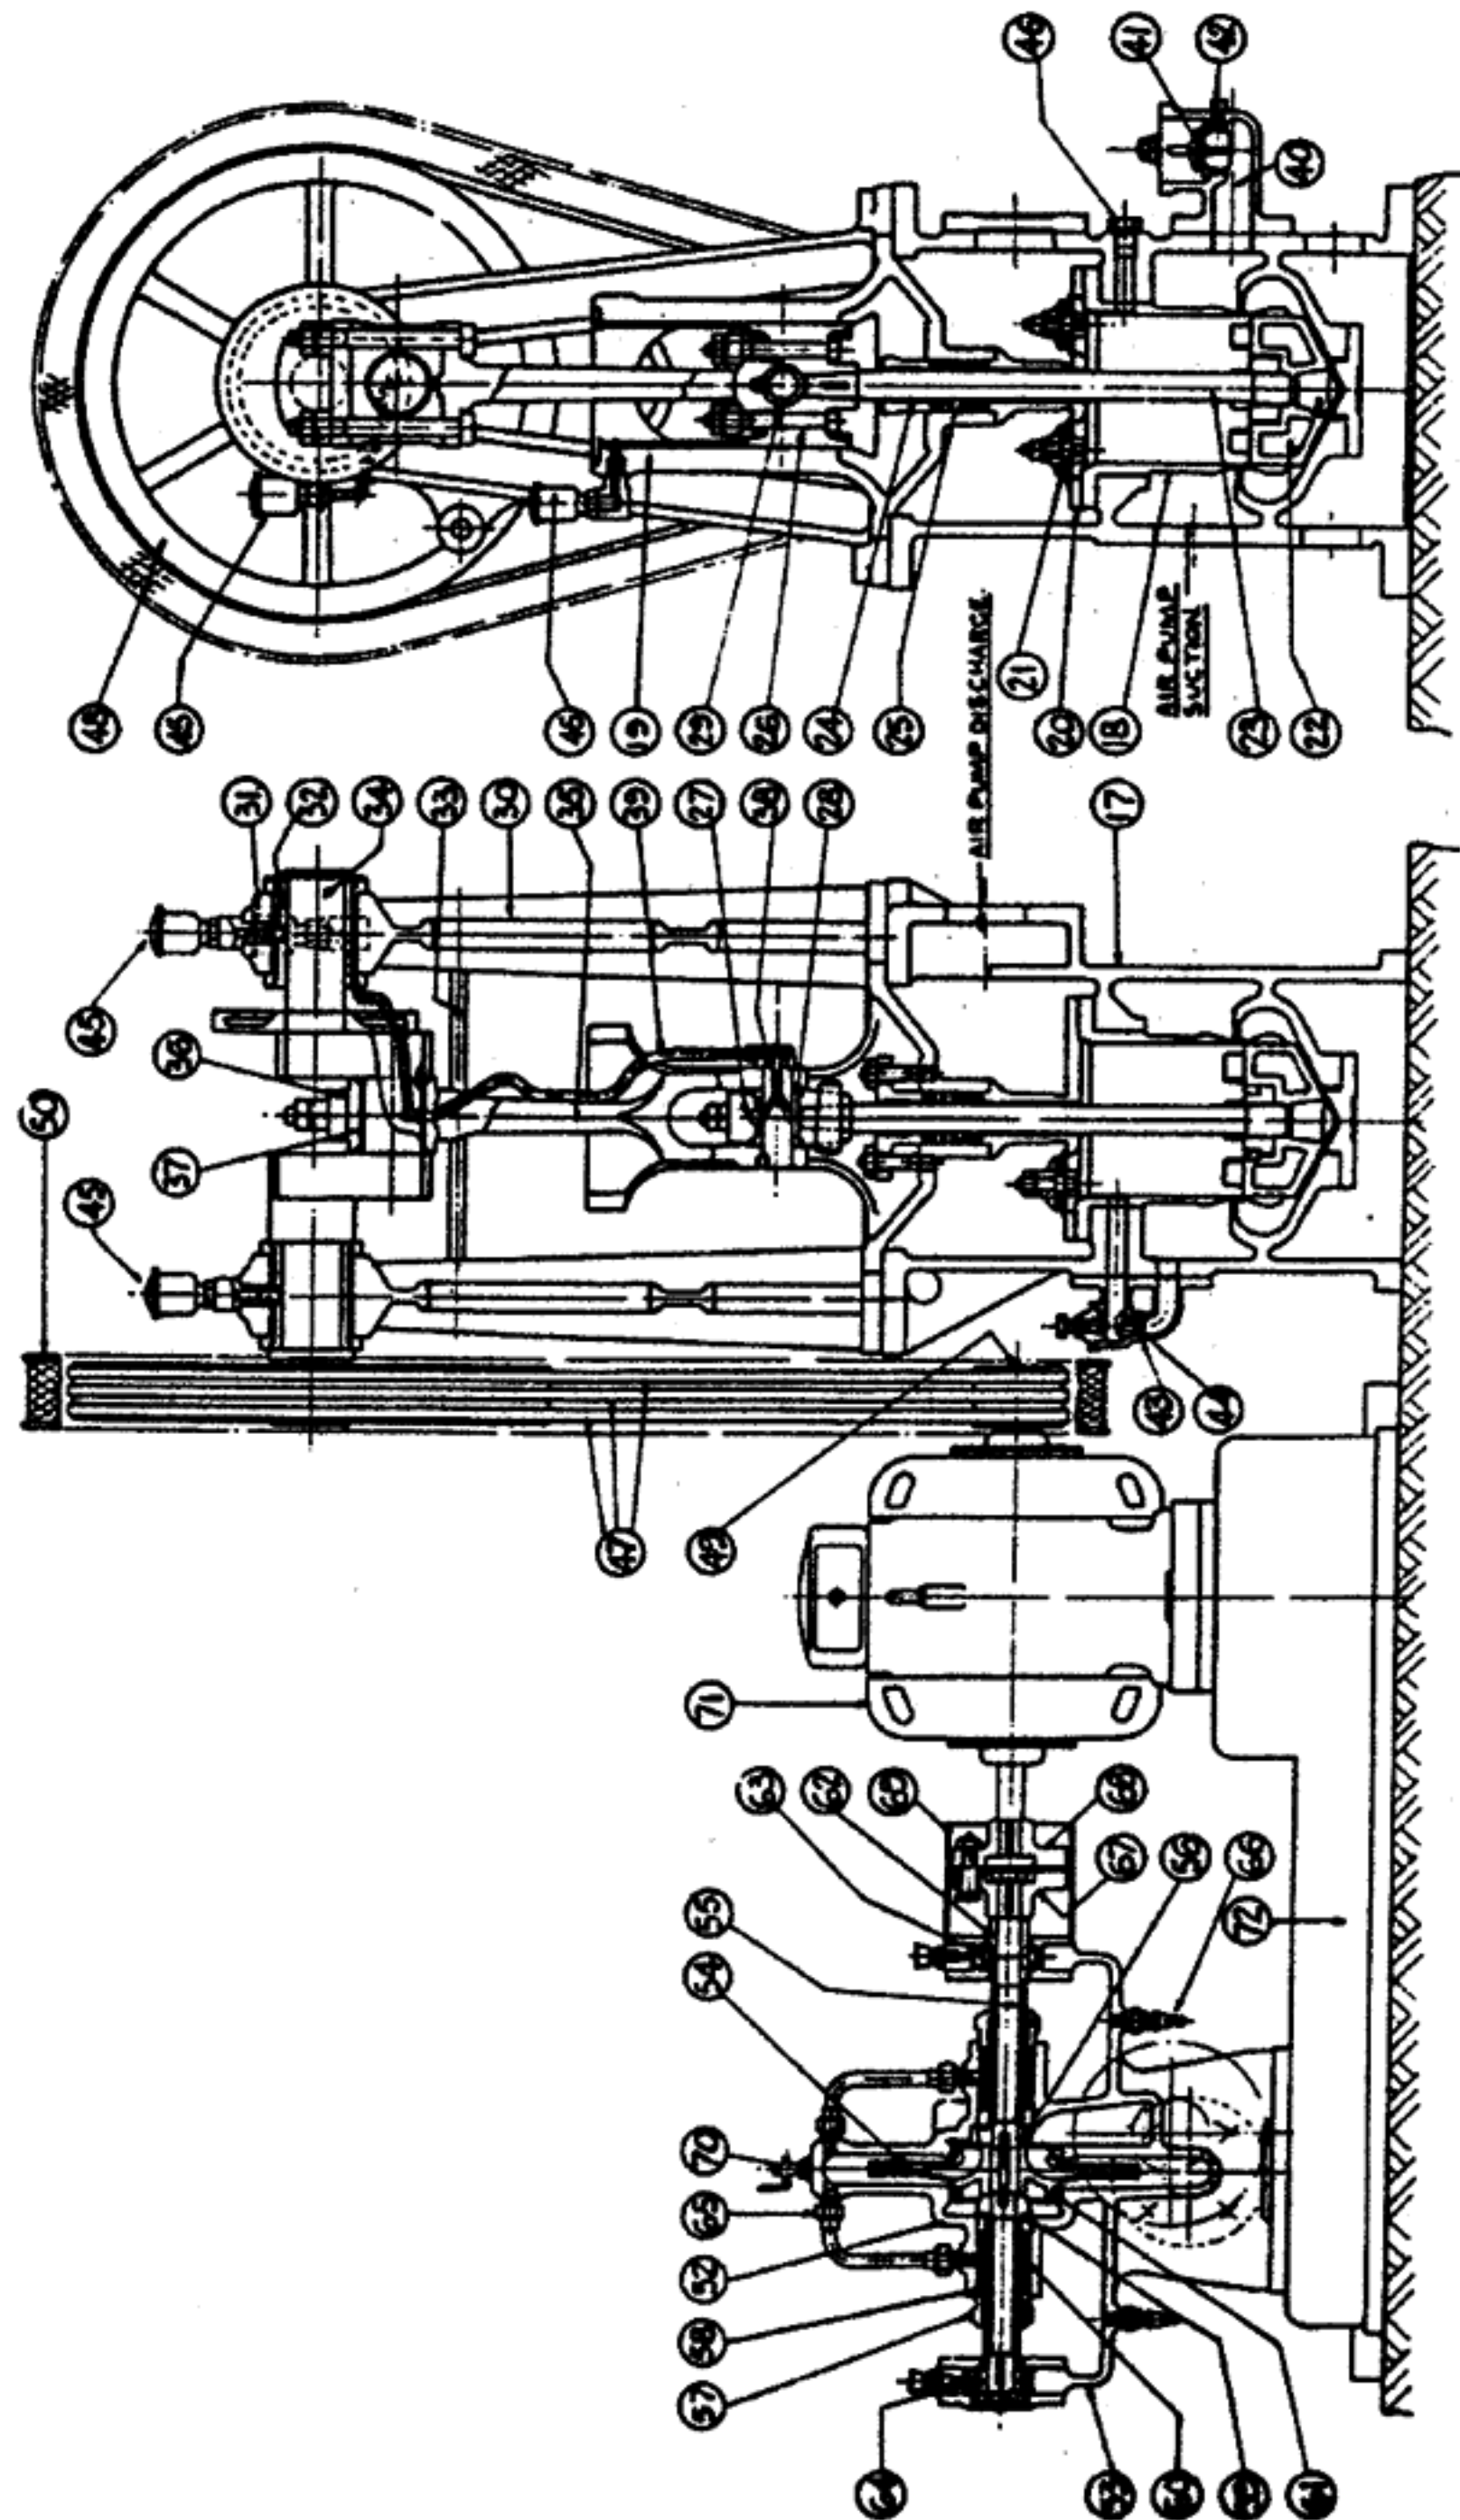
Sectional arrangements of condenser, air and circulating pumps.
